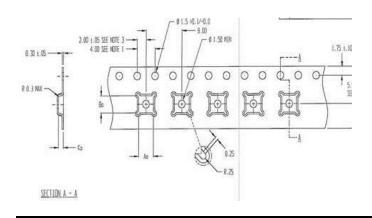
Tape drawing for 3x3mm packages Ao=3.30, Bo=3.30, Ko=1.10
